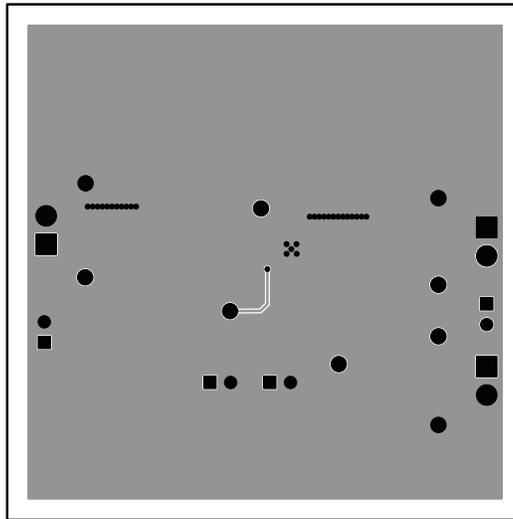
TPS54622EVM-012 Bottom-Side Layout
